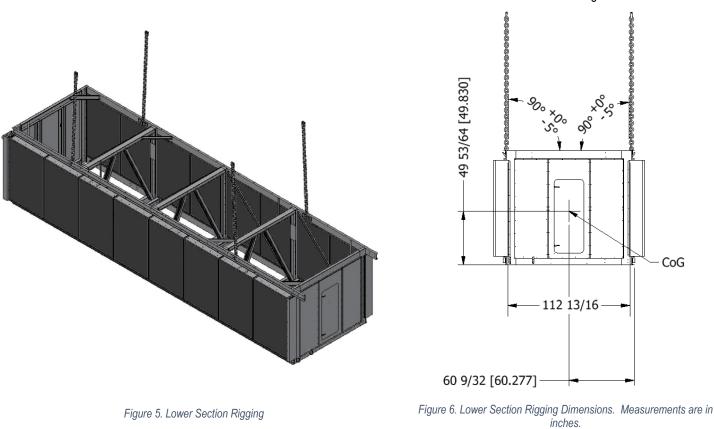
Lower Section Rigging Dimensions. Measurements are in inches.
